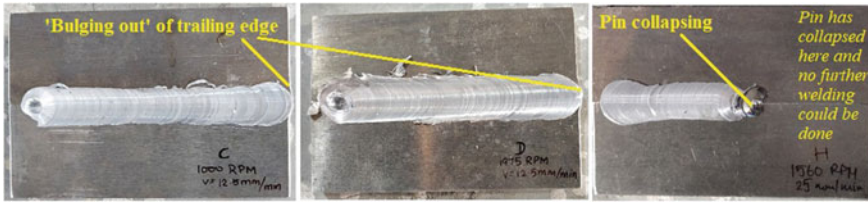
Defects found in FS-welded samples; *Bulging out* trailing edges in samples C and D; *Pin collapsing* in sample H
